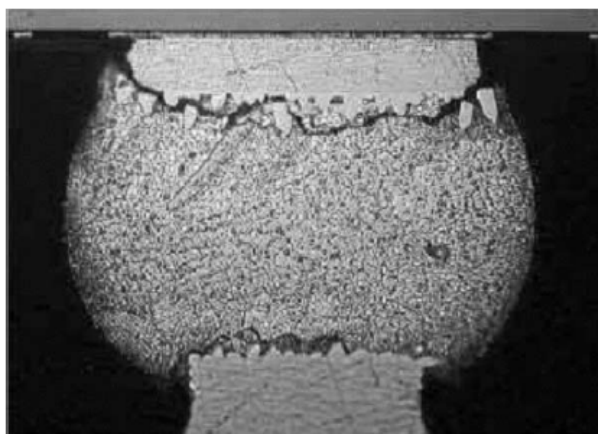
Example of crack along the bulk of solder joint [3].
